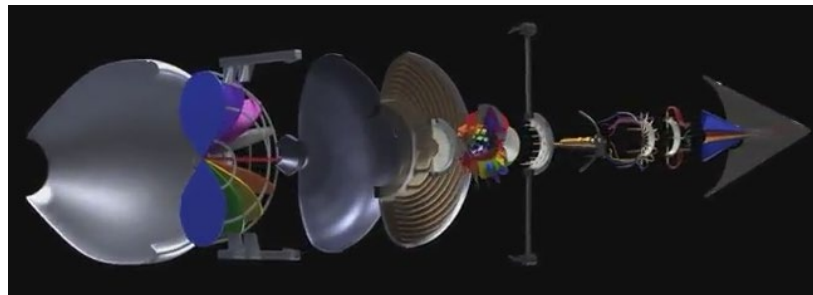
MOLTEN SEA TORUS VAJRA IMPLOSIVE TURBINE SWIRL GUIDE EXPLODED VIEW
